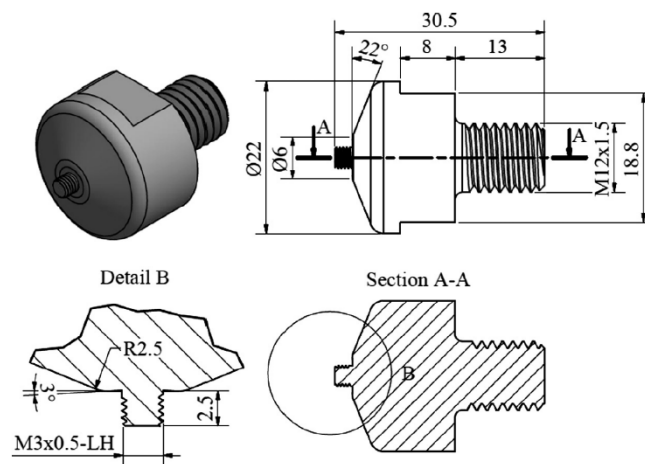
Geometry of the tool used for post-processing MIG welded plates (dimensions in mm).
